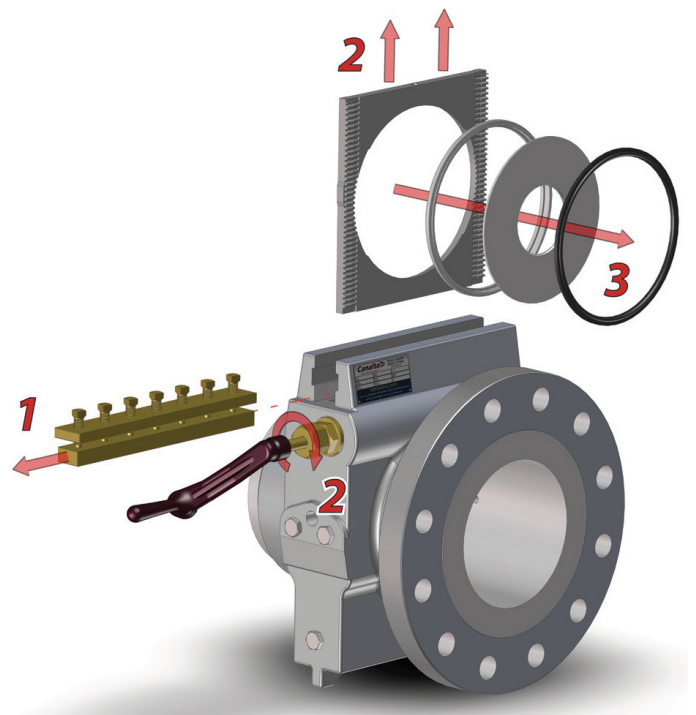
Orifice plate removal – 8 to 16 in. models
